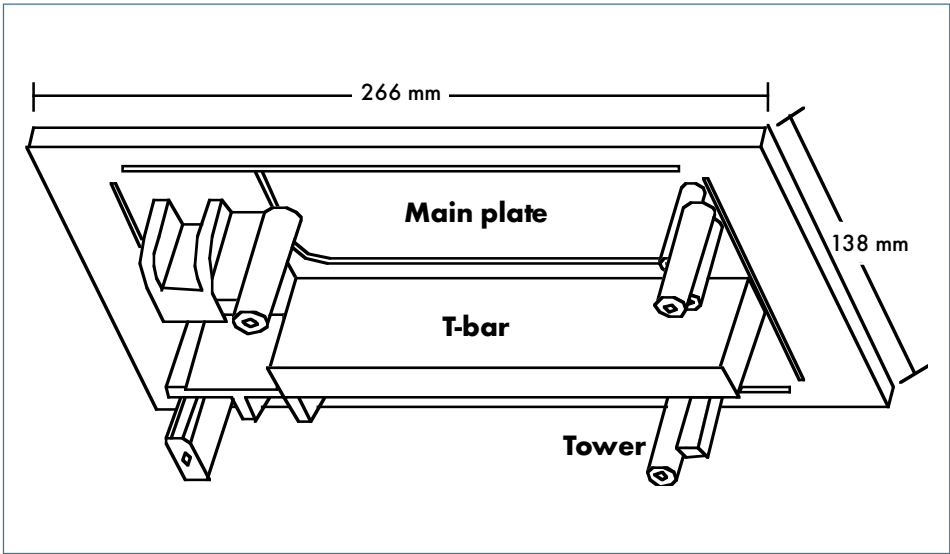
Some dimensions of the commercial component. Main plate thickness is 10 mm.
